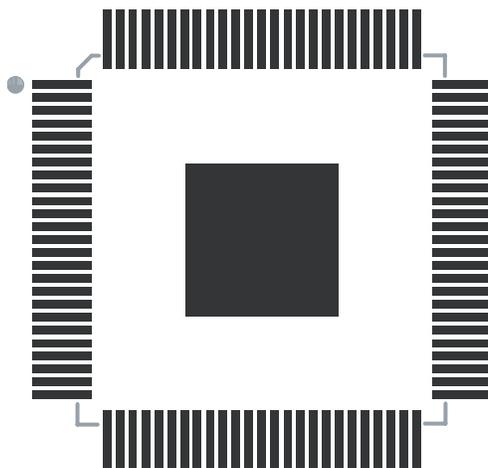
82563EB/82564EB Silkscreen and Components Pad (Top View)
